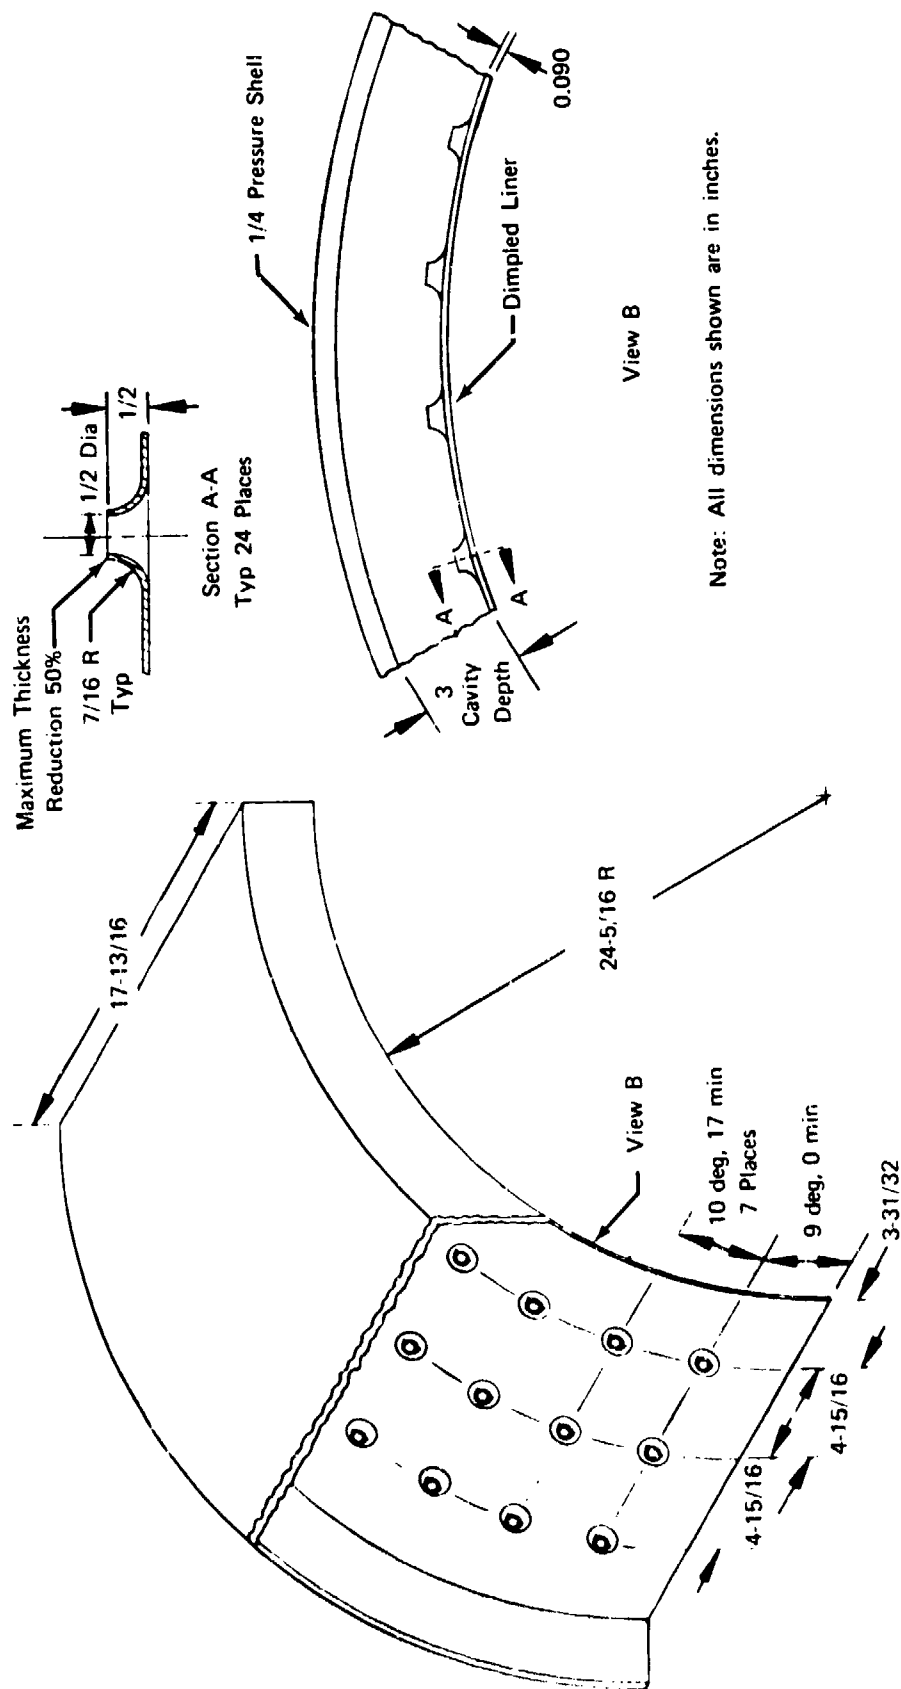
Liner Mounting Design Showing Dimpled Liner Installed
